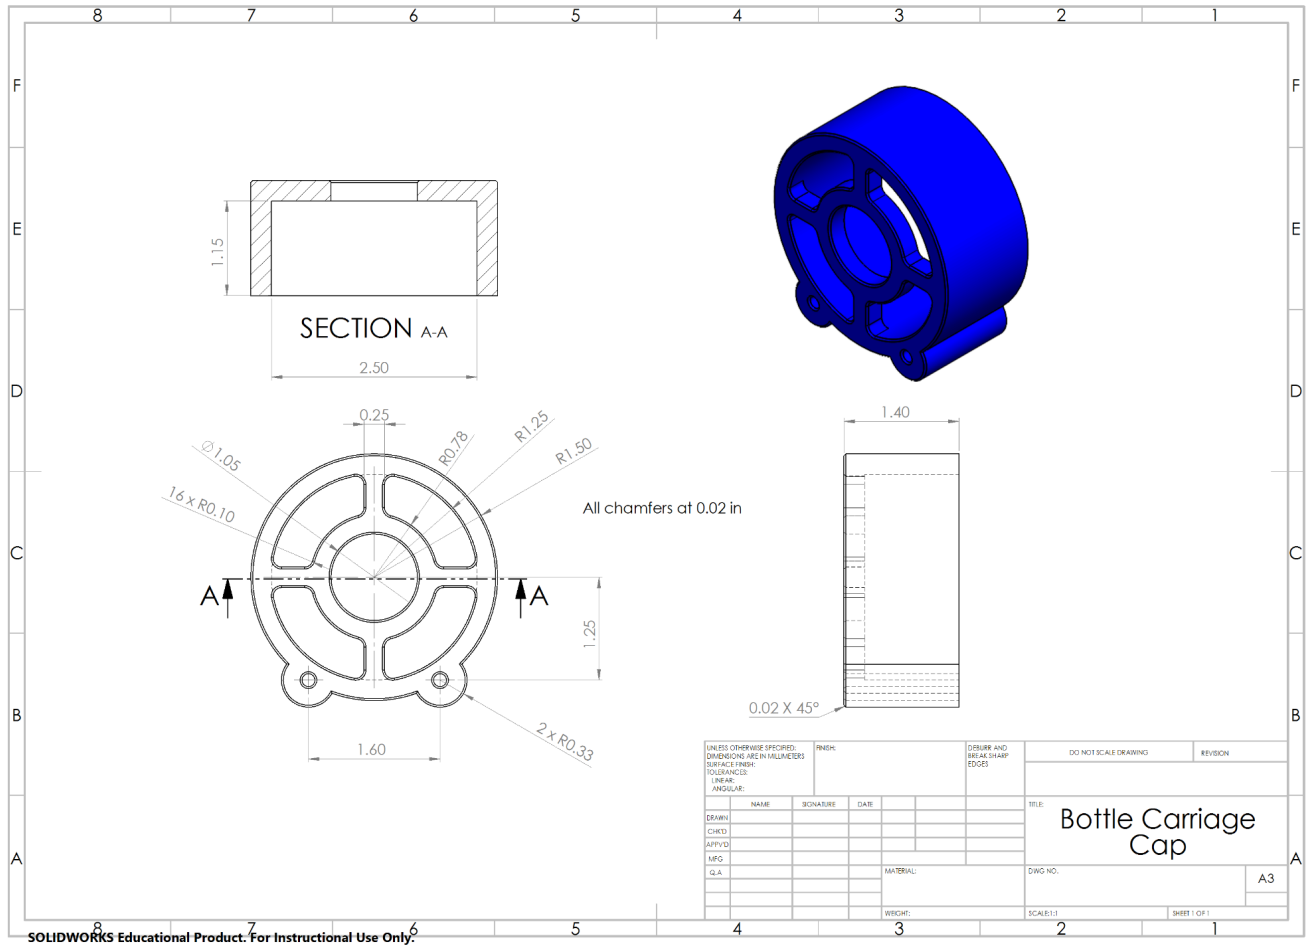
SolidWorks Drawing of Bottle Carriage Cap (3D Printed)
